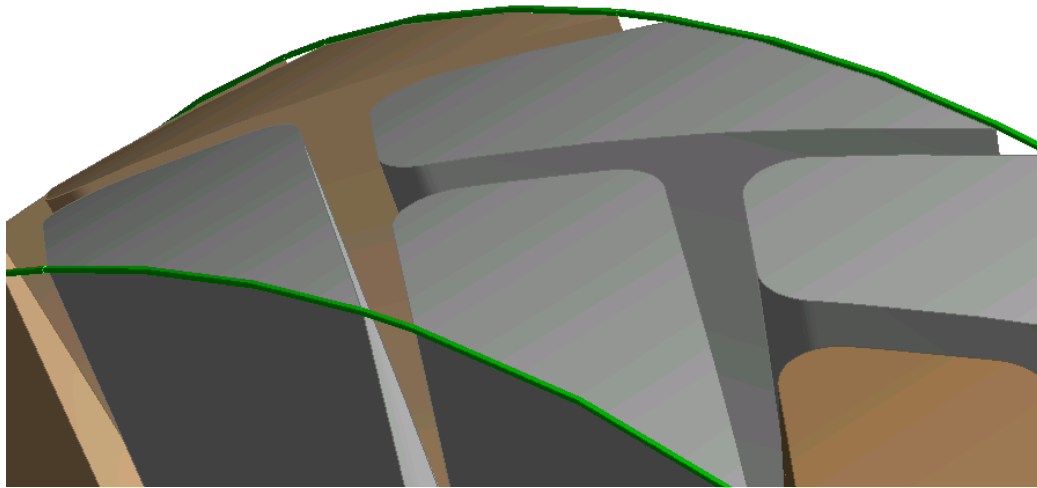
Relative positions of the axial clearance disk and the radial clearance ring; in the assembly the axial clearance disks are fitted inside the radial clearance ring.
